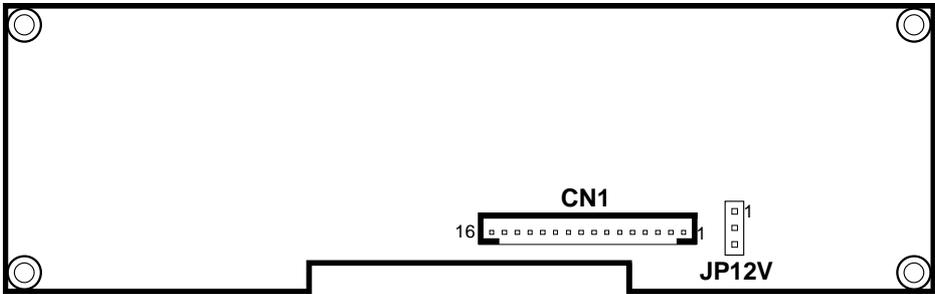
MB-4103 & LD720 VFD Board Component Locations
